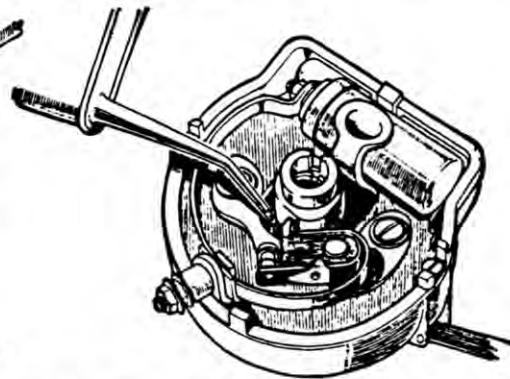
Centrifugal advance mechanism may be oiled through gap between breaker base & cam, but text suggests better method.
